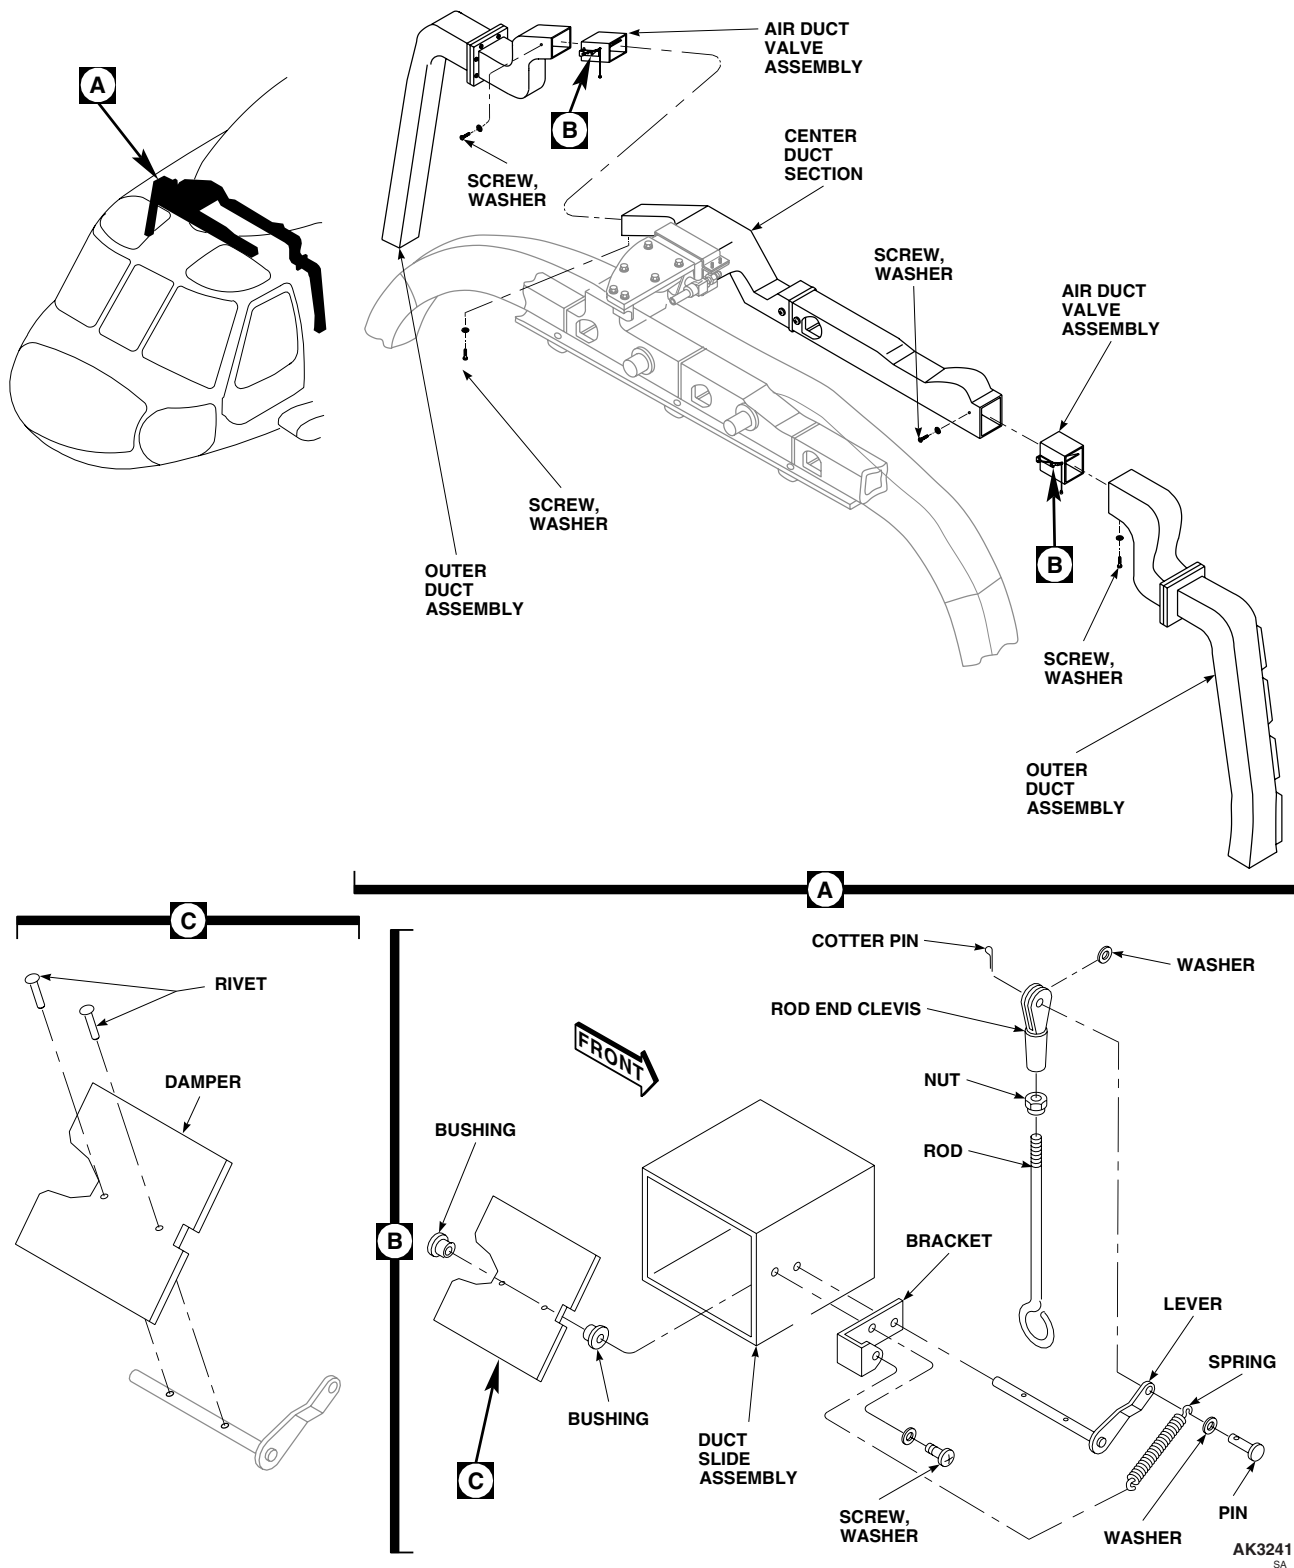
Replace Heating and Ventilation System Air Duct Valve Assemblies.
